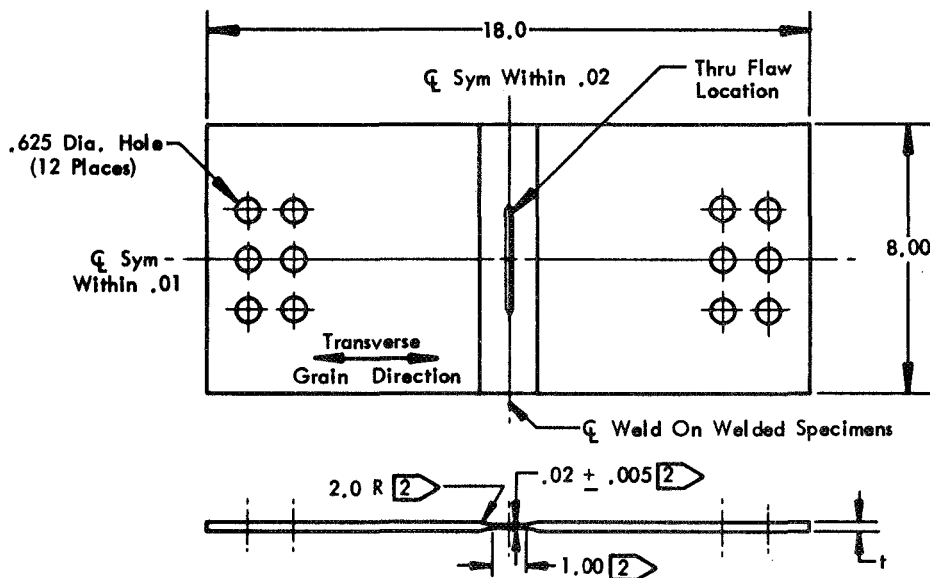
SURFACE FLAW SPECIMEN FOR 2219 ALUMINUM WELD
